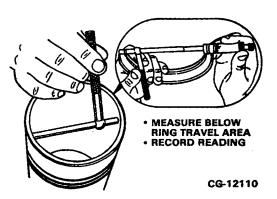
Check Cylinder Sleeve I.D. @ Below Ring Travel
